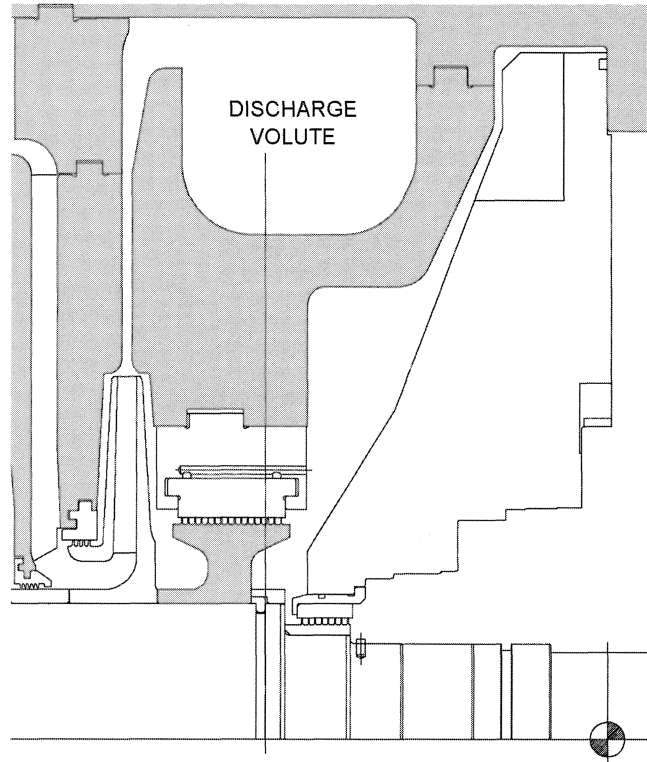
Location of Balance Piston and Discharge Volute for an Inline Compressor.
